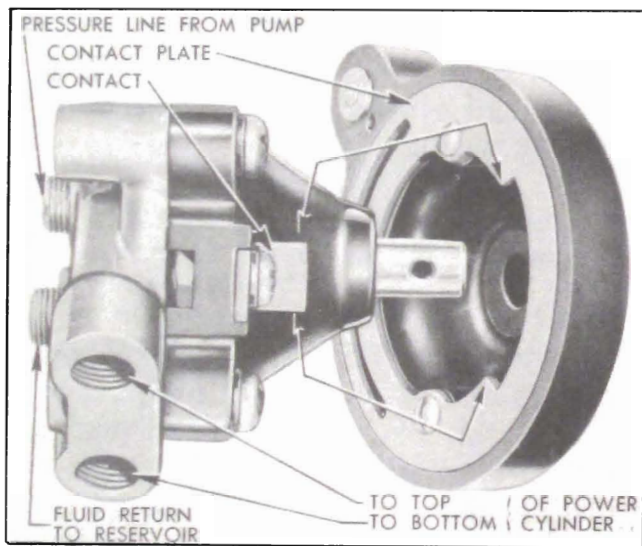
Control Valve and Switch Assembly, with Cover Removed
